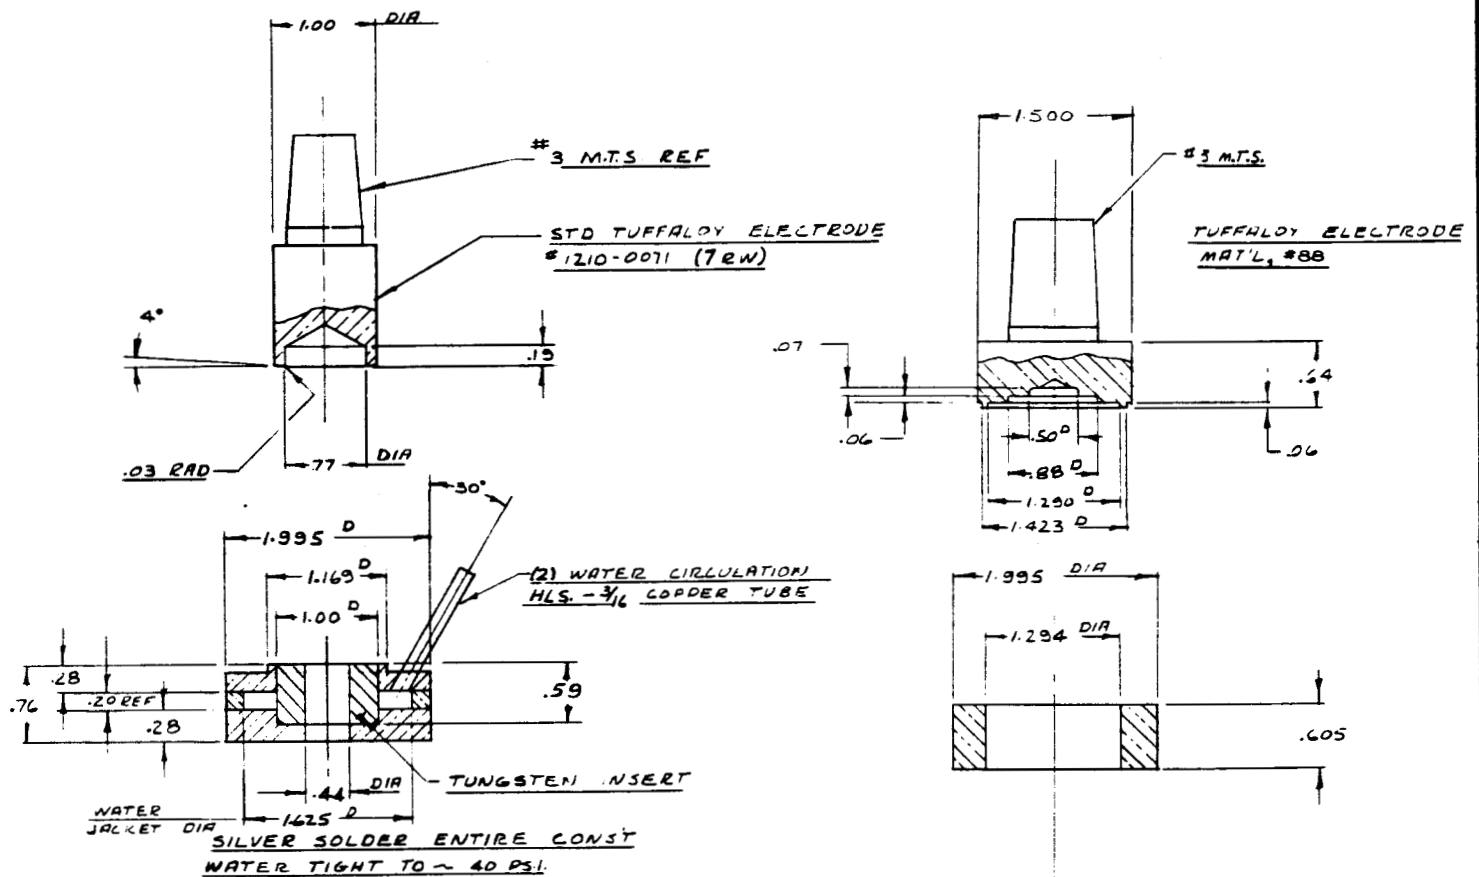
PROJECTION WELDING ELECTRODES
